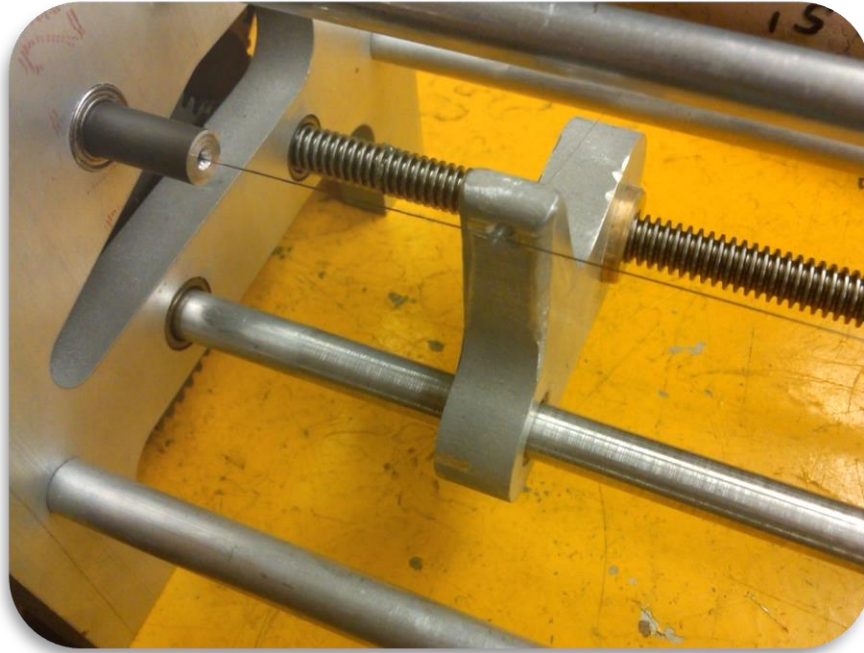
Close up picture of coil winder mechanism used for metal coil creation.
